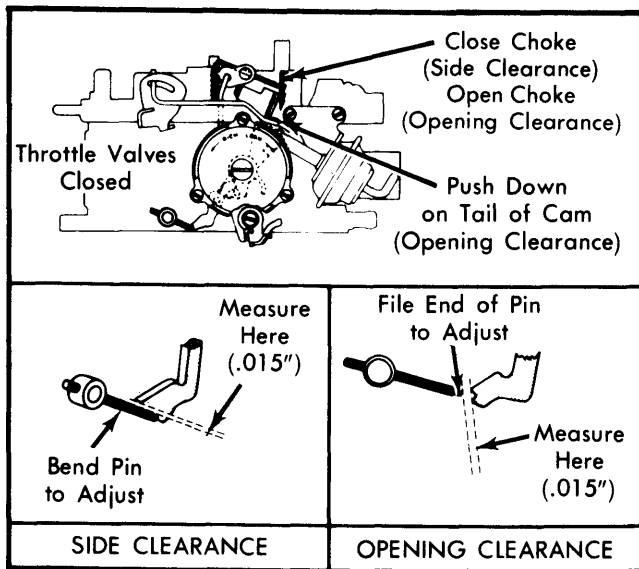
Adjusting Secondary Throttle Valve Lockout
